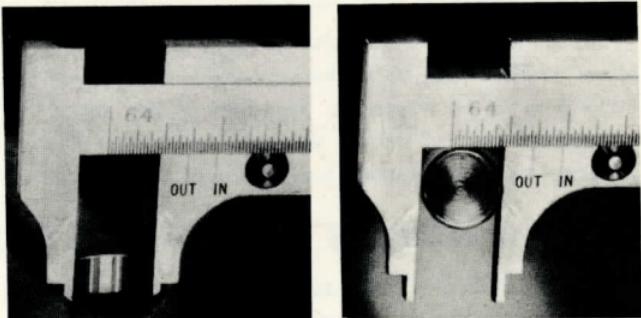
Pocket Slide Calipers measure both inside and outside dimensions.
